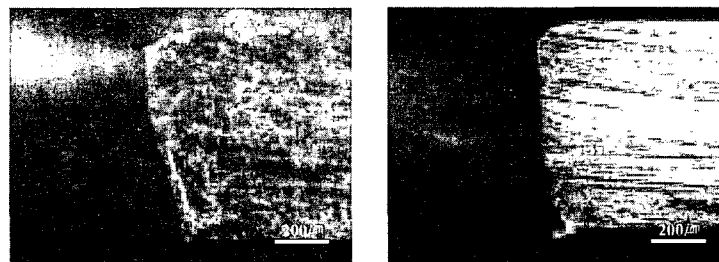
Profile of the punched holes formed by conventional punching. Thickness of sheet is 1mm. Diameter of the die is 12.10mm. Clearance is 0.08mm
